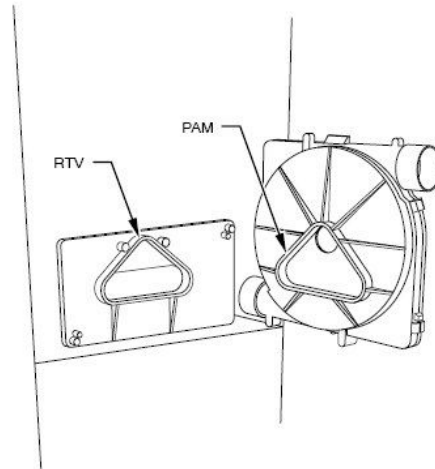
Inducer Motor Assembly in Upflow Furnace Orientation
